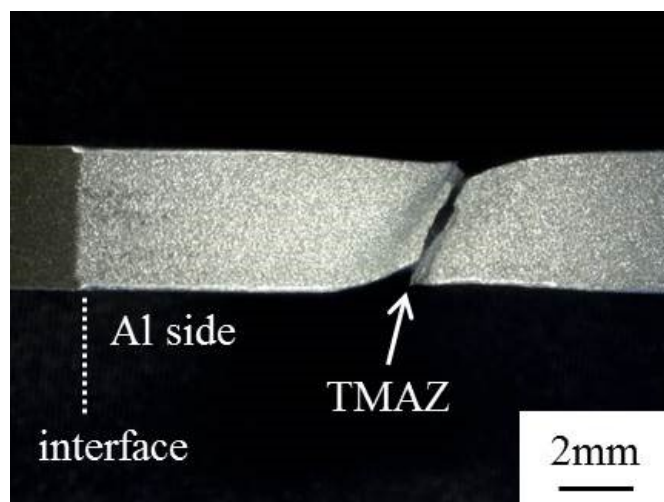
Side view of tensile-fractured Al-Steel joint without welding flash.
